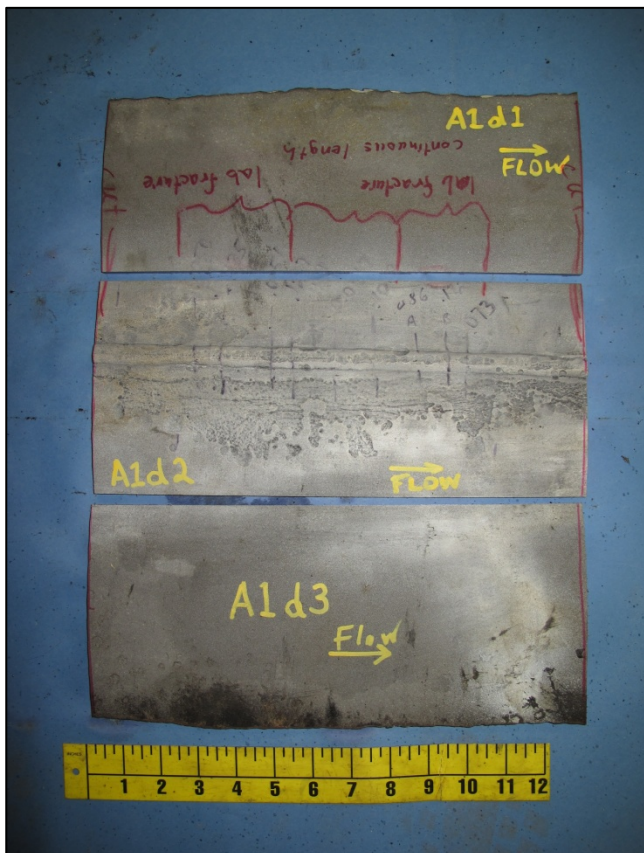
View of piece A1d2 cut from piece A1 to conduct lab fractures of crack indications detected by NDI.
